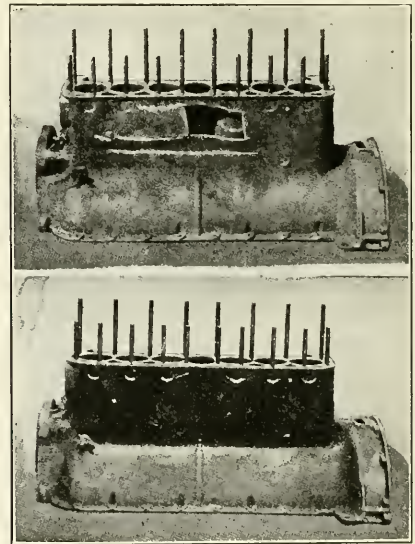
THIS ILLUSTRATION SHOWS THE WATER JACKET WELDED AND PAINTED—AS GOOD AS NEW—AFTER BEING BRONZE WELDED.
